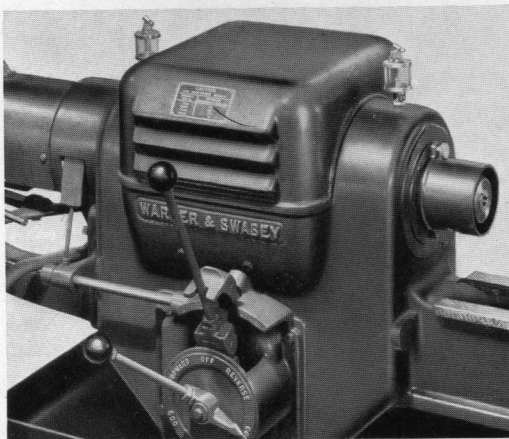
Electric spindle machines have sight feed oilers at both ends of the headstock.
